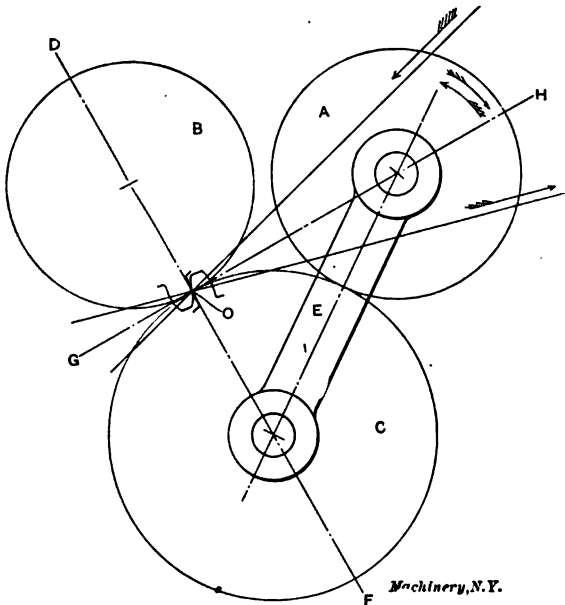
Correct Design of Tumbler Gear to run in Both Directions
